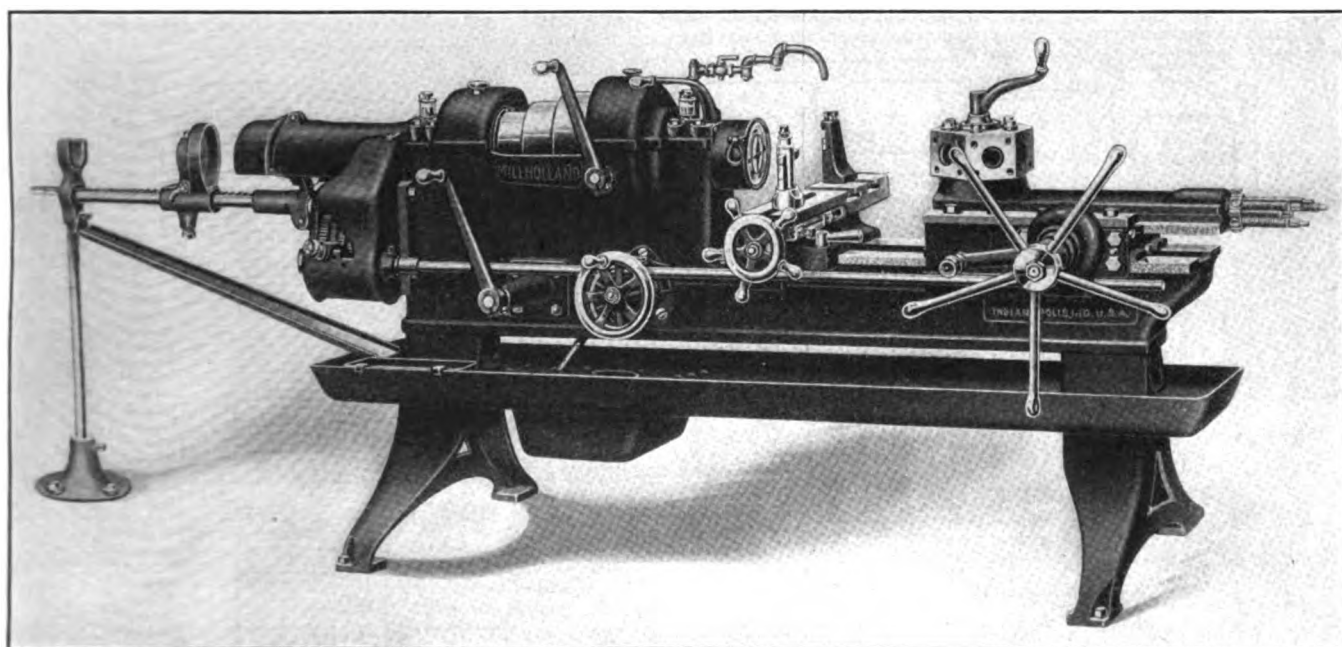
THE MILLHOLLAND TURRET LATHE, INCORPORATING SEVERAL INTERESTING FEATURES
